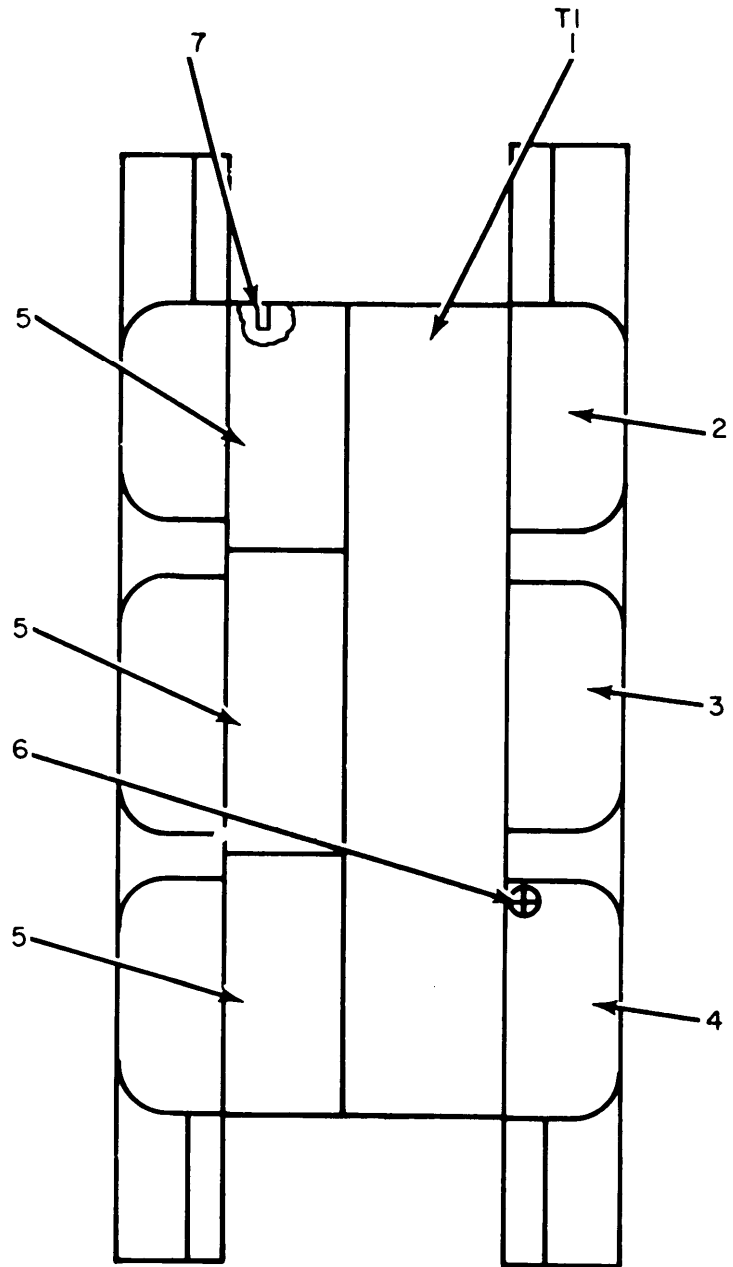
Power Supply PP-4606B/G, Rectifier Assembly.
